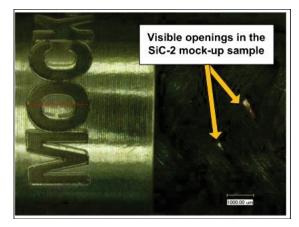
Visible open porosity in the SiC-2 mock-up specimen (1-ply) prior to radiographic inspection.
